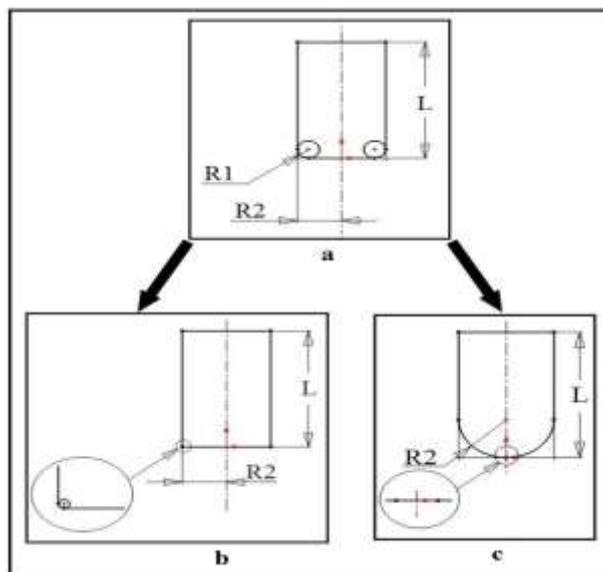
Tool Shapes: (a) Radius end mill, (b) Flat end mill and (c) Ball end mill cutter.
